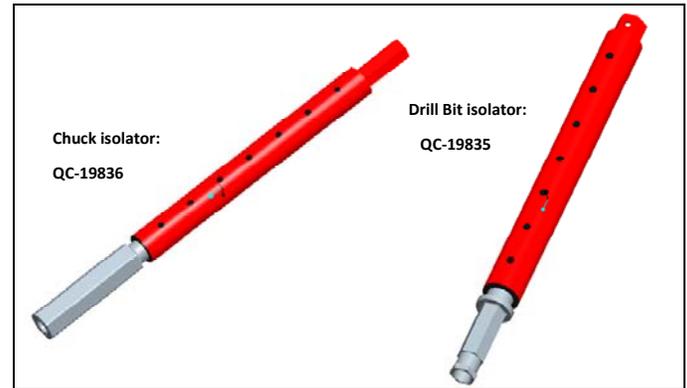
Final production designs of isolators for use with 35-mm-diameter drill bits.
